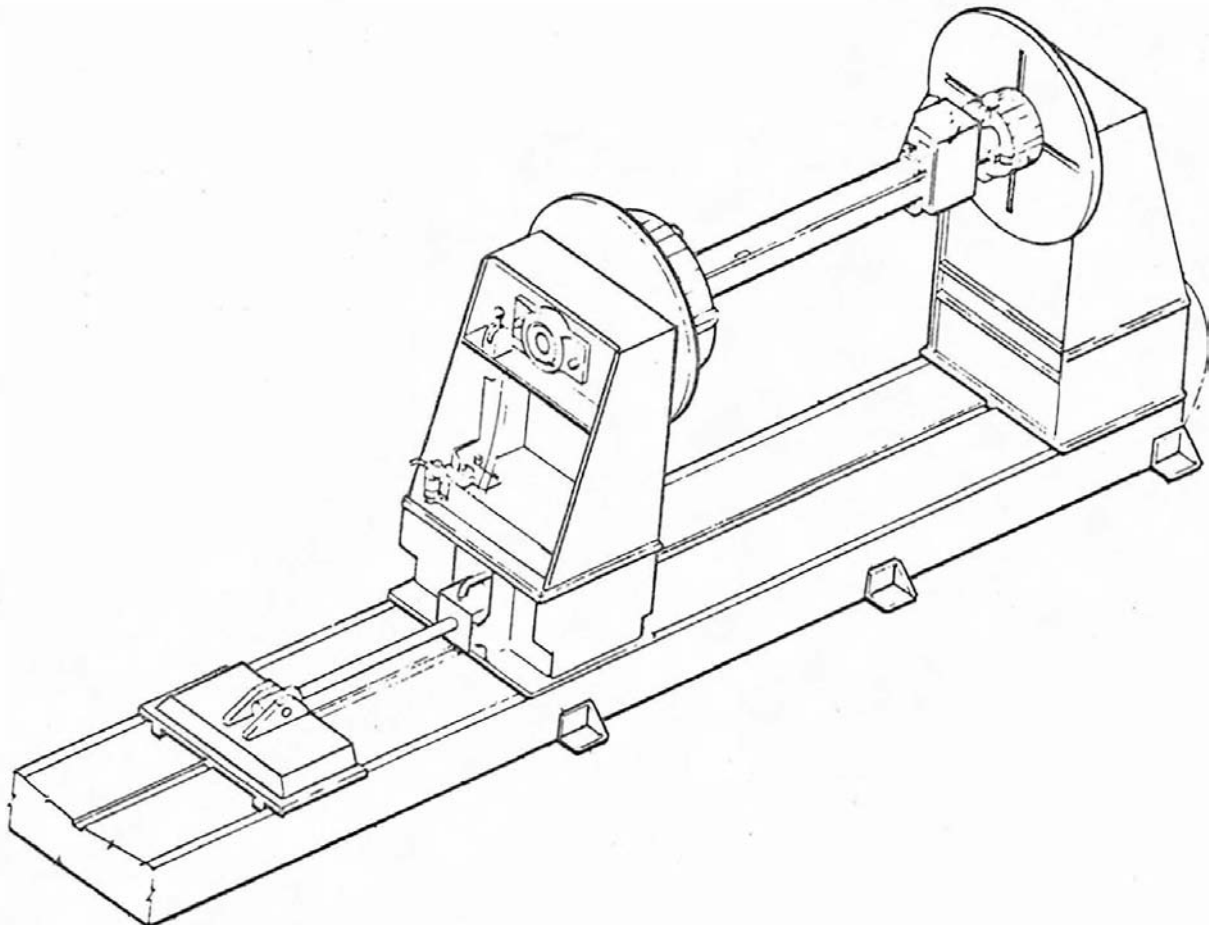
Lower Ring Actuator Support Strut Assemblies Weld
